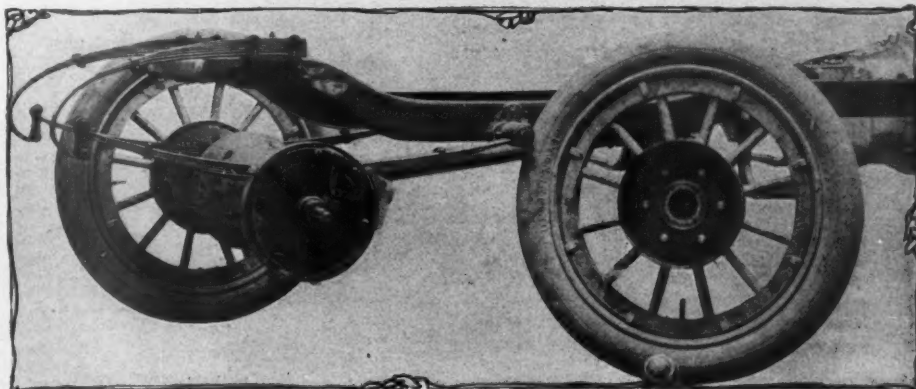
SHOWING REAR END CONSTRUCTION OF 1911 COLE 30 CHASSIS
